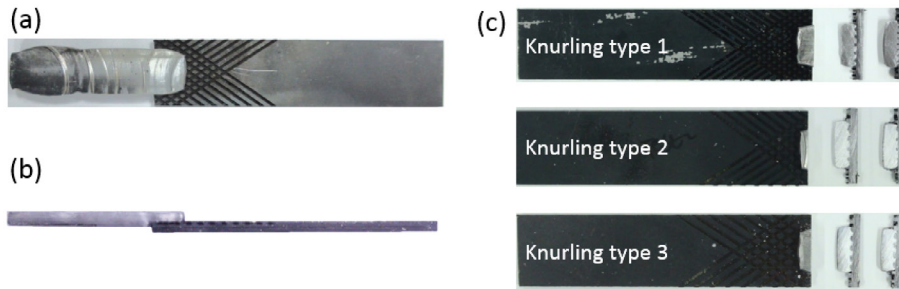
(a), (b) Steel-6061 Al forged simple tension test specimen and (c) section of the joining area for the three different knurling
